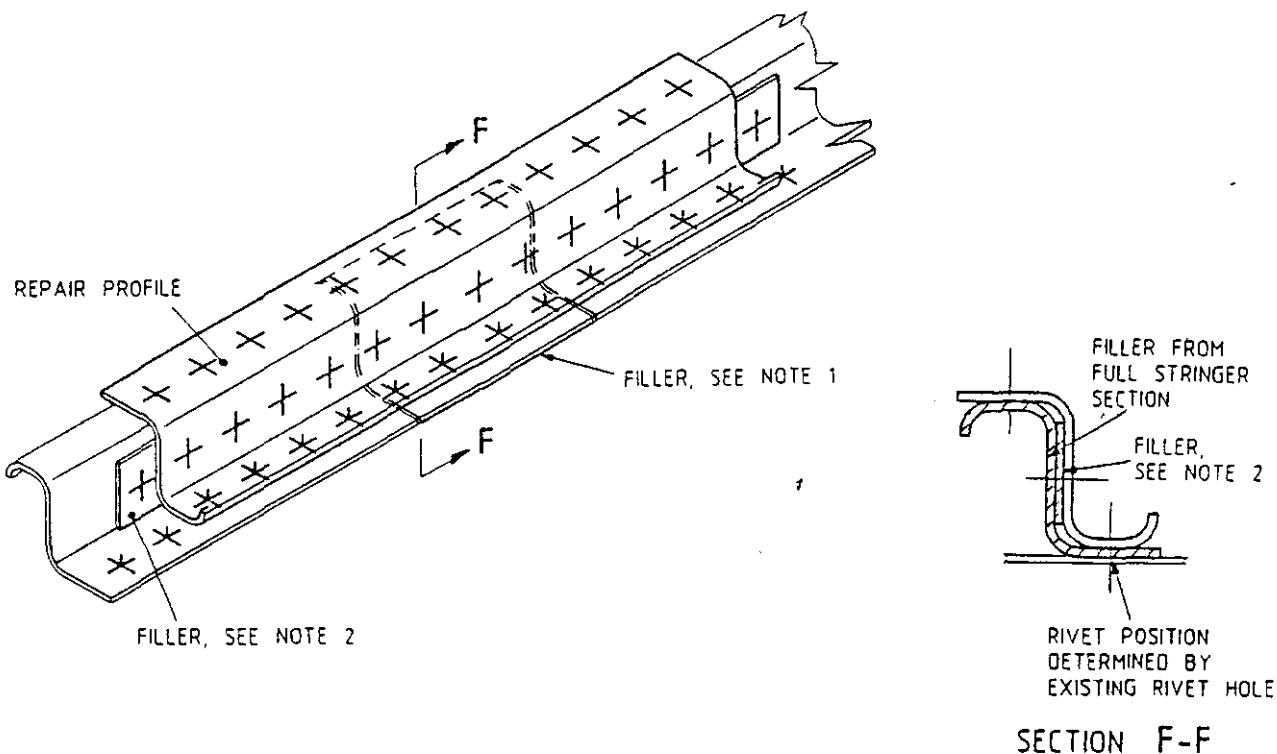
Repair of Formed Stringers; ORIGINALLY RIVETTED STRINGERS
